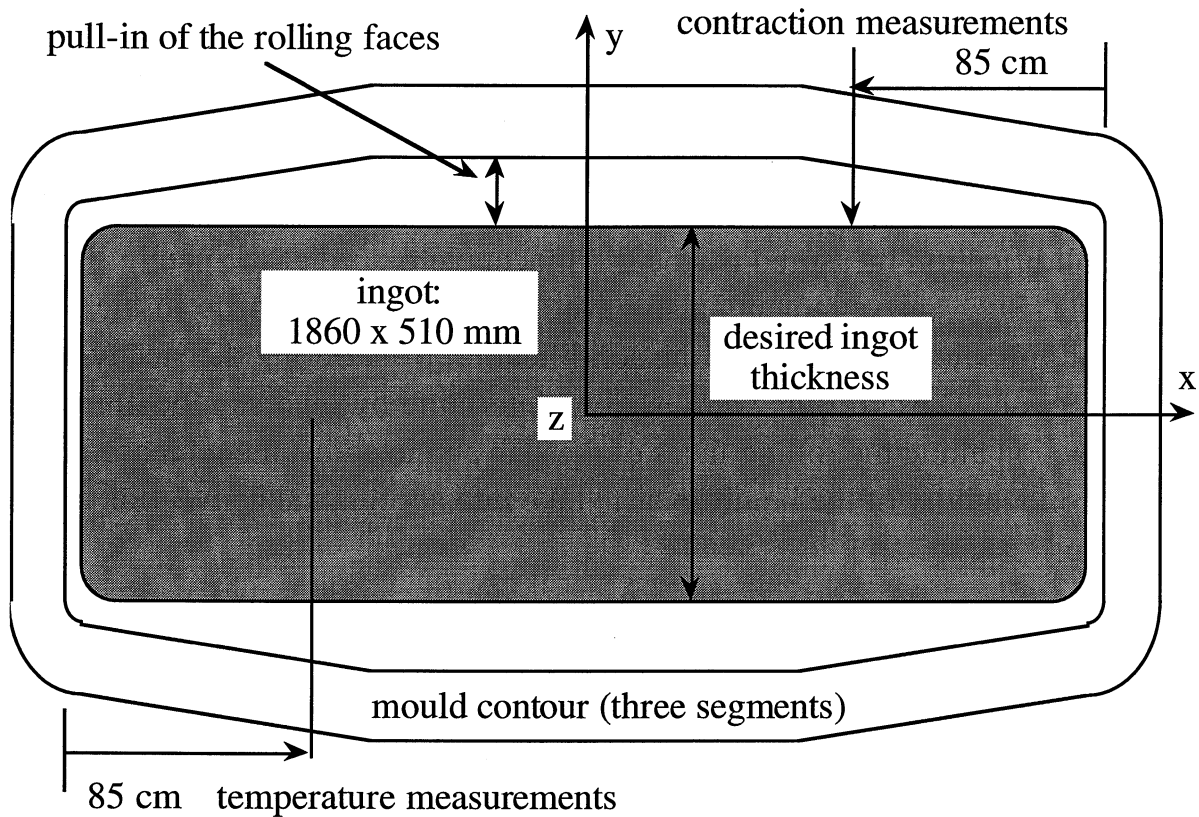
schematic top view of the mould shape and position of the experimental set-ups.
